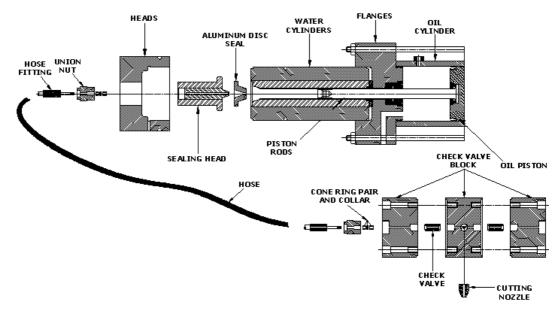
Exploded view of the left side of current design intensifier and high pressure parts
